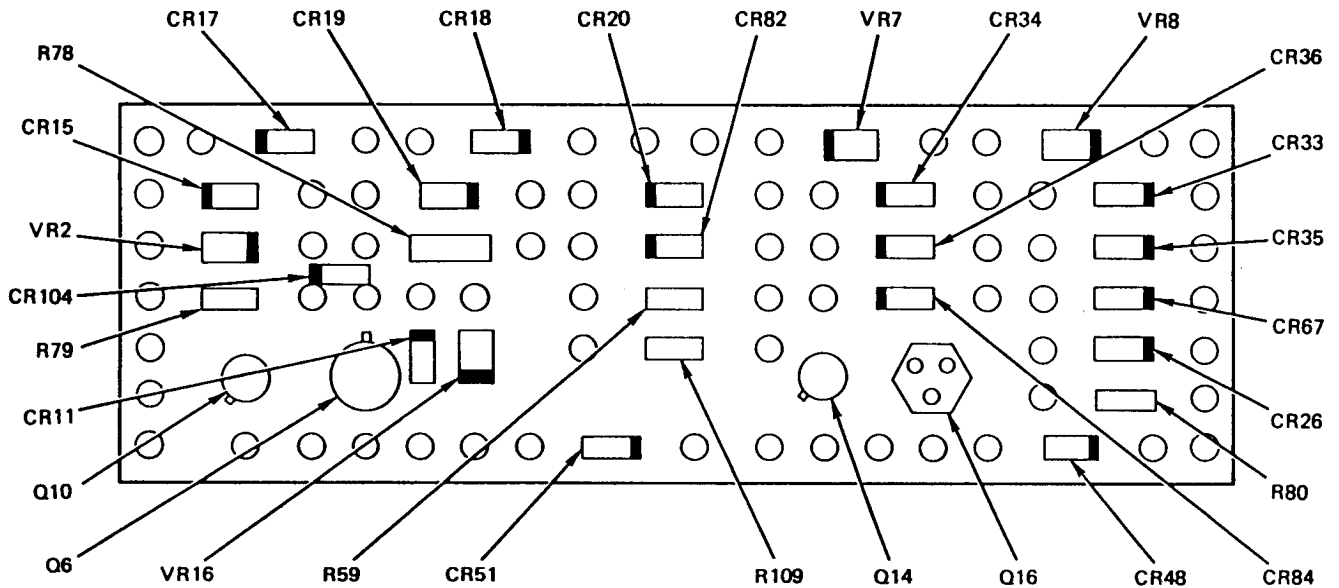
Component Assembly No. 1 A1 Parts Location Diagram
